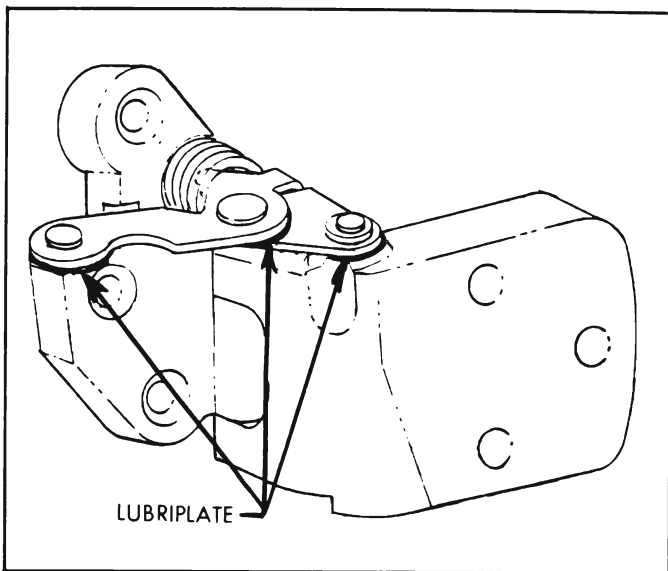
Lubrication of Rear Door Hinge and Hole-Open
